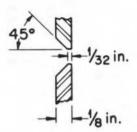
Joint design used for connecting back-extruded half sections by the gas tungsten-arc process. A root opening of ½ in. was typically used.
